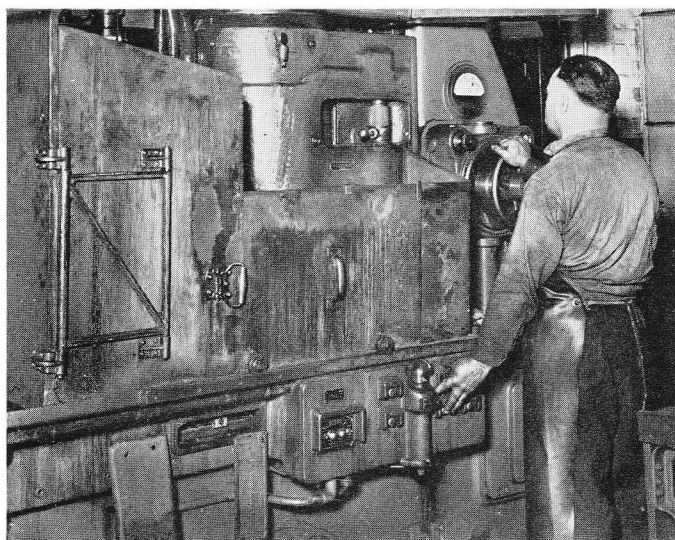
Peak machine capacity is obtained by operator using ammeter in spindle motor circuit to set grinder feed for optimum loading.
